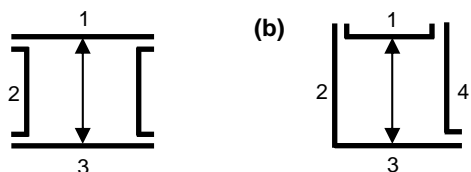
Two box designs (a) without and (b) with adjustable height during assembly [1].
